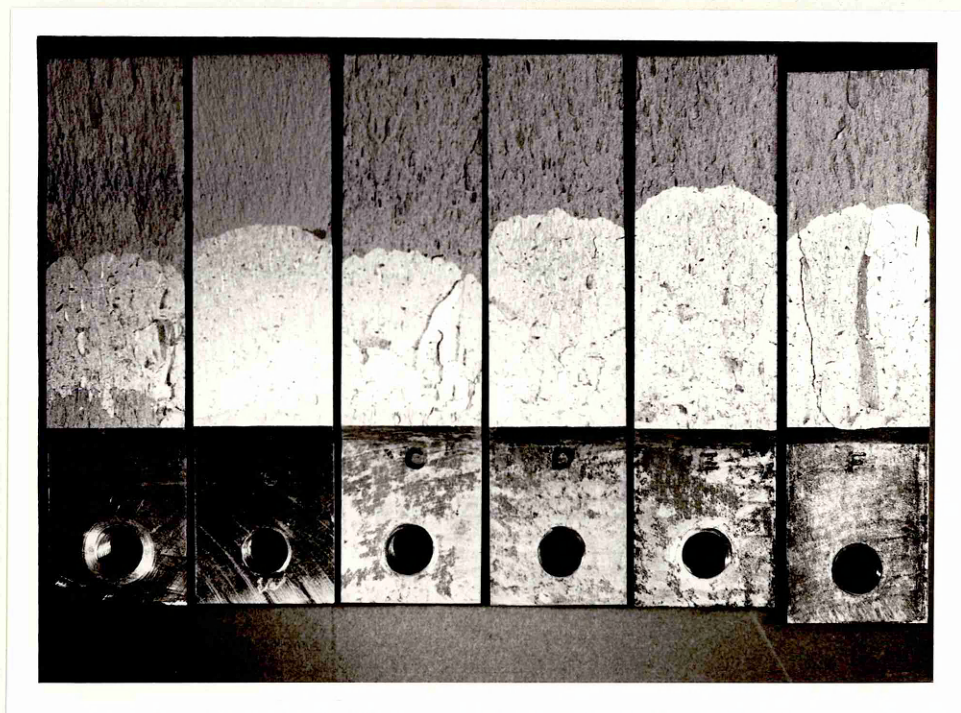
View of SCC fracture surfaces for test environments A-F (from left A to right F).
